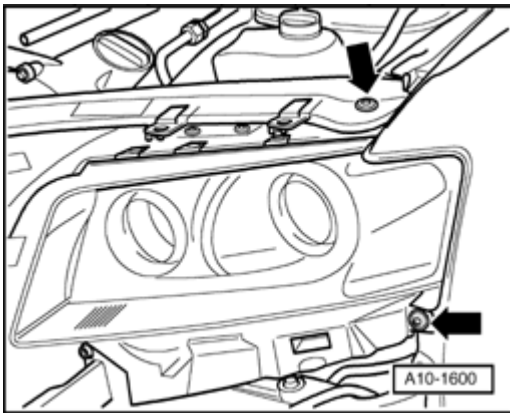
Removing Bolts And Pulling Lock Carrier Toward Front
